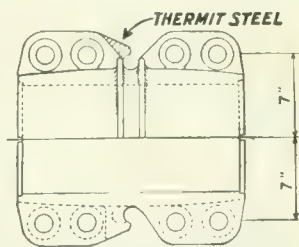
CABLE CLAMP WITH BUILT UP LUG
